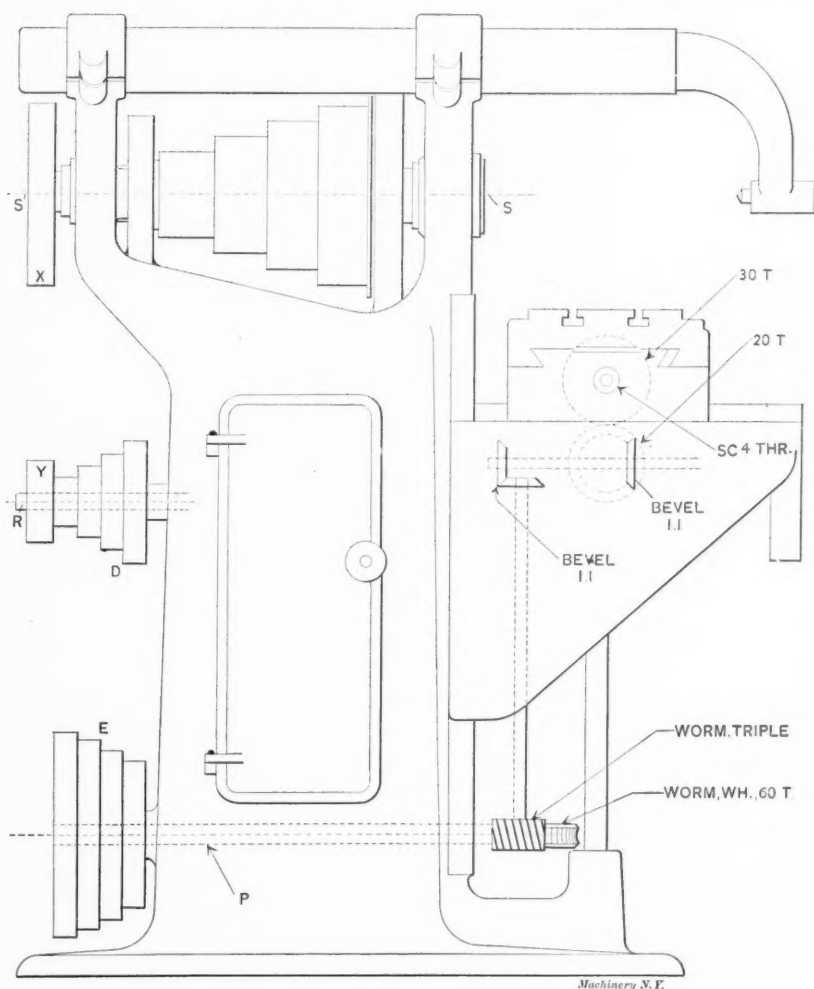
ILLUSTRATING MILLING MACHINE FEEDS.
